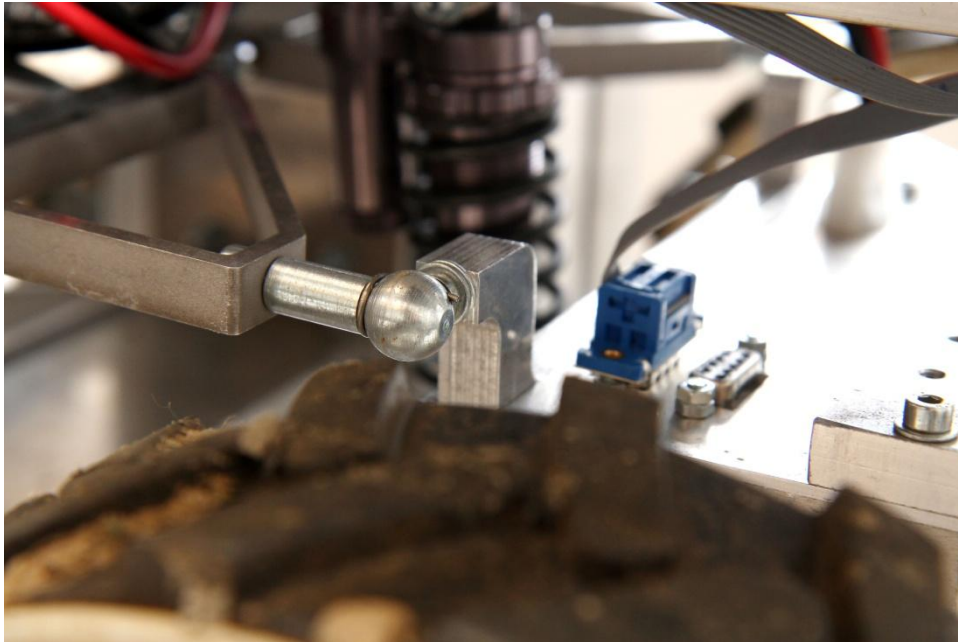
The construction was assembled using bolts, nuts and ready made joints
